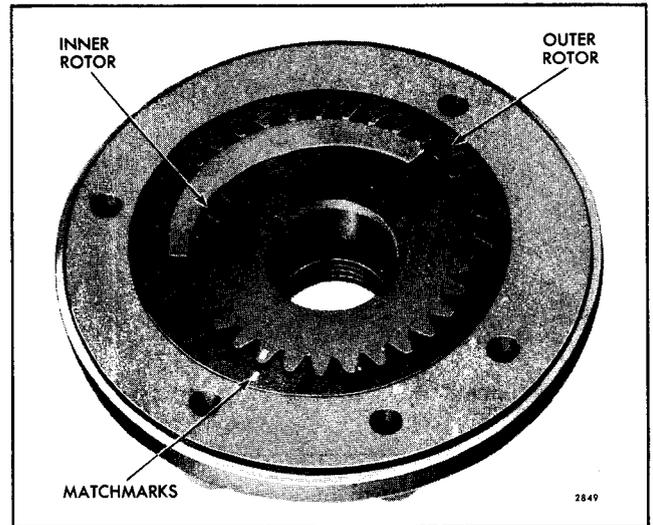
· Location of Matchmarks on Inner and Outer Oil Pump Rotors (Gears)
